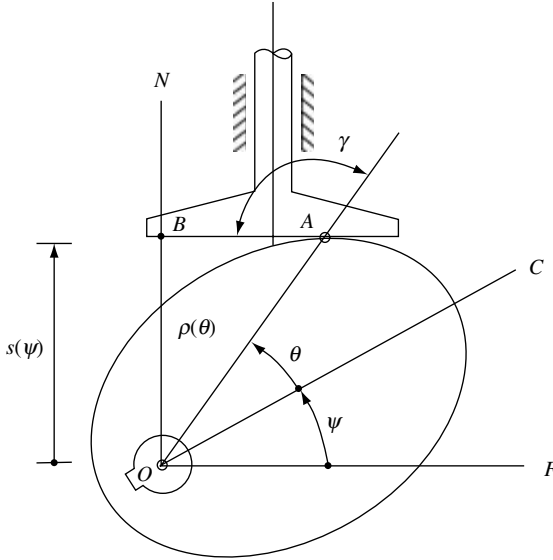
Layout of a translating flat-face follower cam mechanism.
